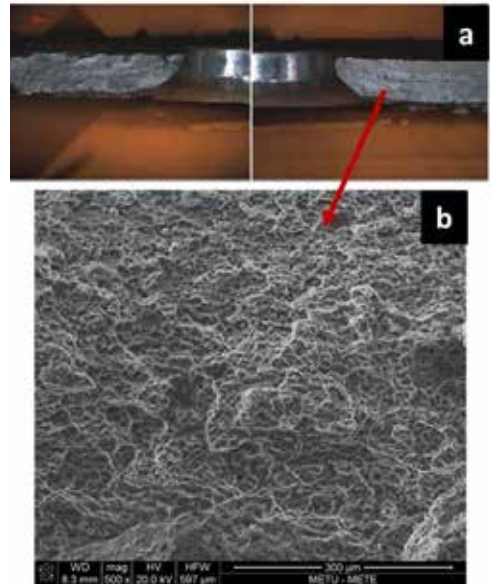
a. Optical microscopy image of fractured metal sheet surface b. Scanning electron microscopy image of fractured rivet surface
